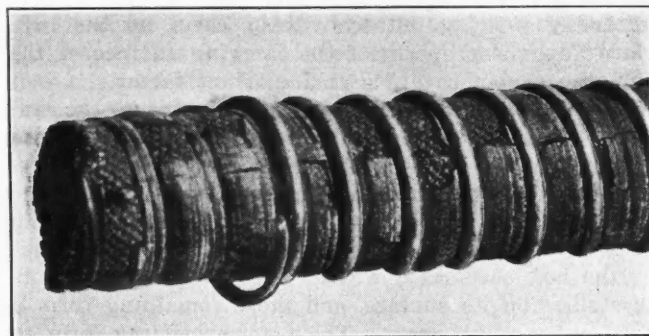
DISTORTION PRODUCED BY WIRE WINDING WHICH PREVENTS THE FREE EXPANSION OF THE HOSE
